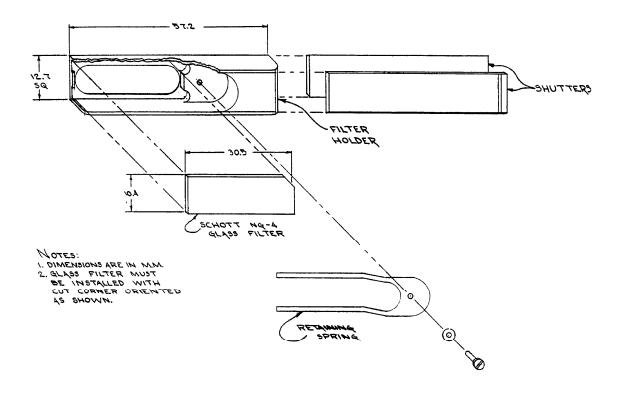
Aluminum alloy filter holder. The retaining spring and the front and rear shutters are illustrated. Dimensions are given in mm.
